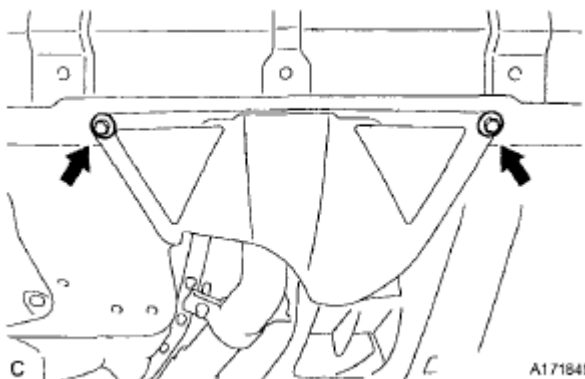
Locating Engine Under Cover Assembly RR And Bolts
